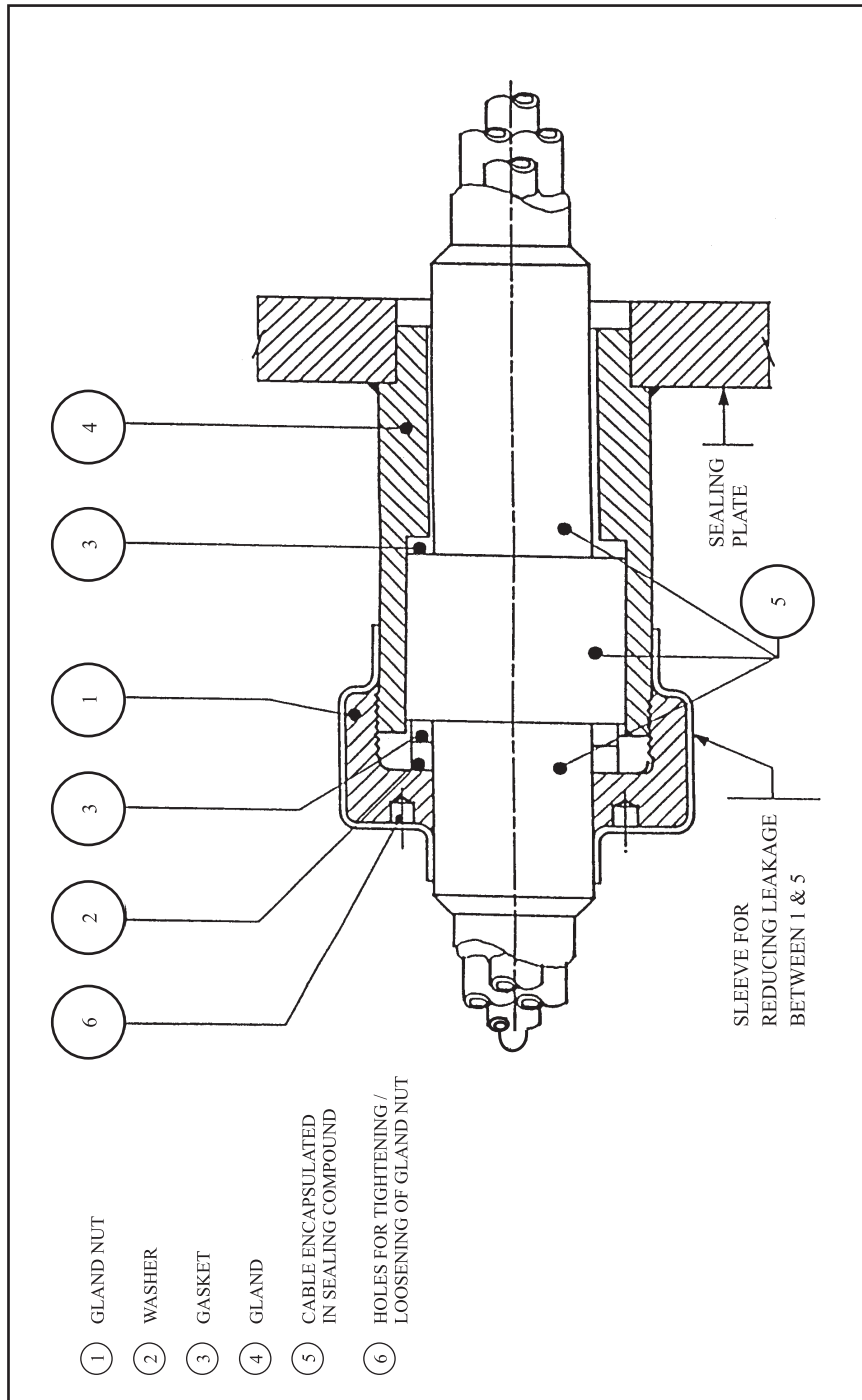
ARRANGEMENT OF CABLE SEAL ASSEMBLY
